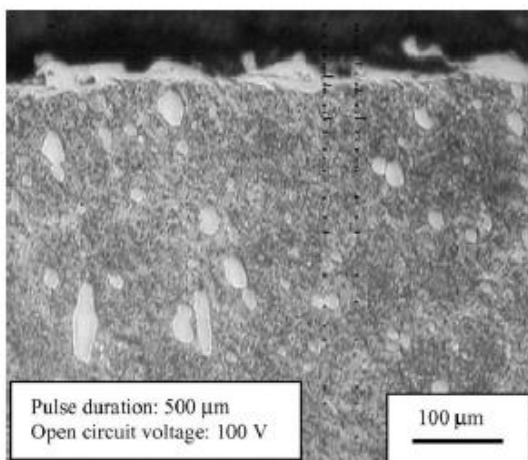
Cross-sectional view of A specimen (dielectric fluid pressure 1.2MPa, wire speed 5 m/min).
